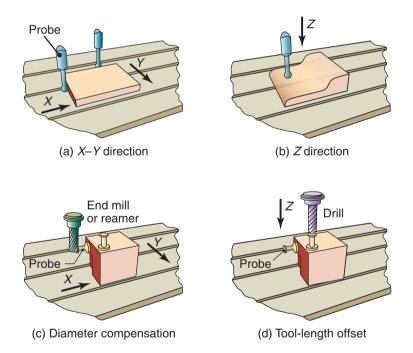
Touch probes used in machining centers for determining workpiece and tool positions and surfaces relative to the machine table or column. Touch probe (a) determining the x-y (horizontal) position of a workpiece, (b) determining the height of a horizontal surface, (c) determining the planar position of the surface of a cutter (*e.g.*, for cutter–diameter compensation), and (d) determining the length of a tool for tool-length offset.
